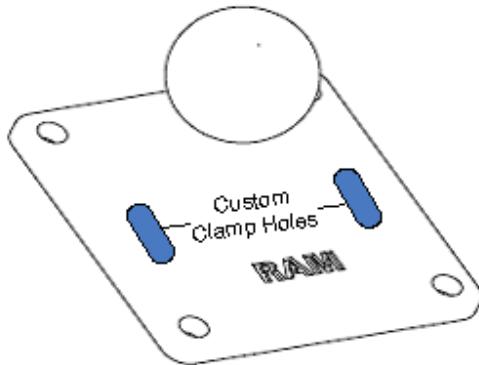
Surface (wall/beam/pole) mounting ball plate (square)
